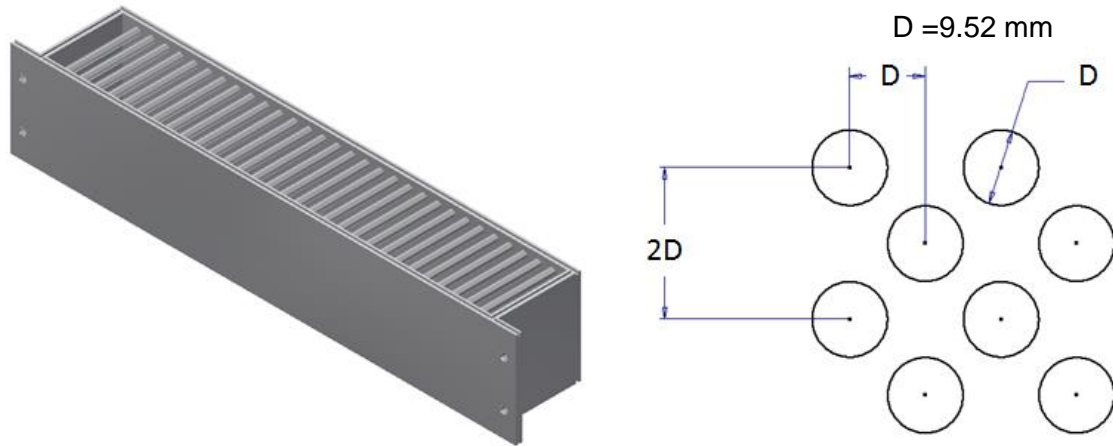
A CAD model showing the design of the pin fin array (left), and the staggered pin fin geometry and its dimensions (right).
